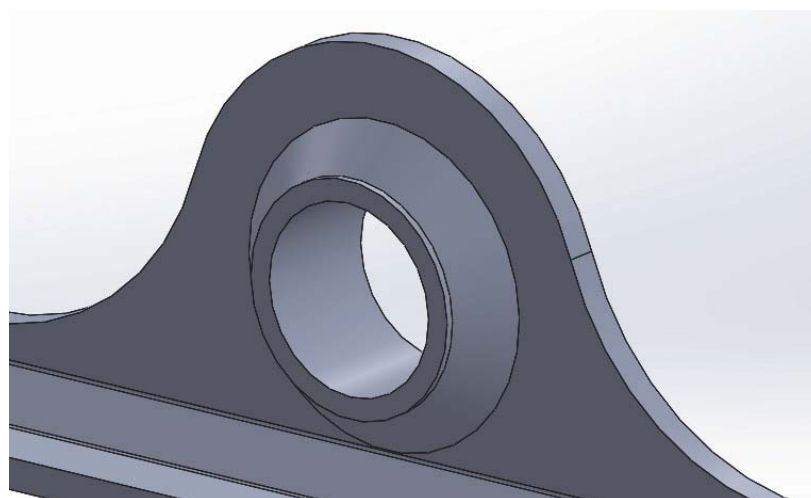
No reference radii were placed in the weld around circular tube.
